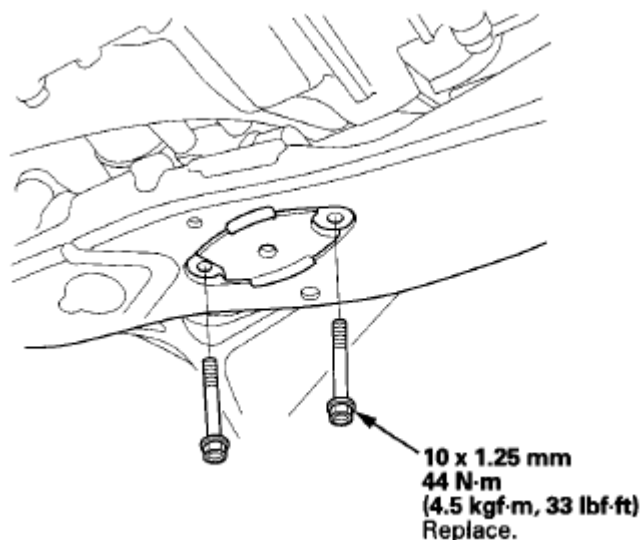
Identifying Transmission Lower Mount Mounting Bolts With Torque Specifications
